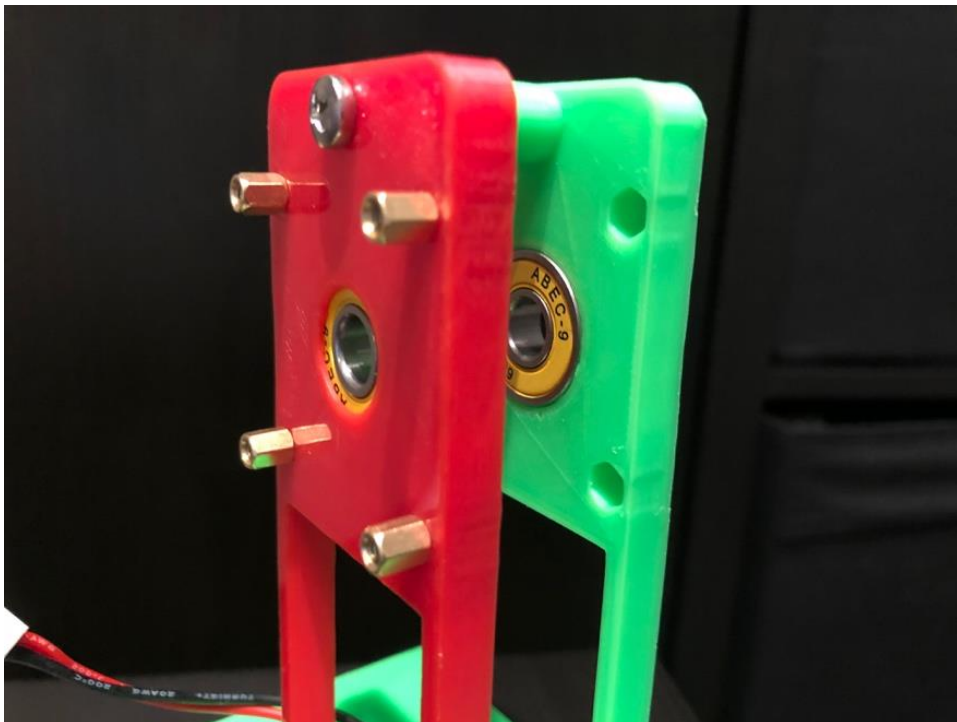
Completed tower assembly with secured overtravel stops, PCB standoffs, and ball bearings (Steps 6-9).
